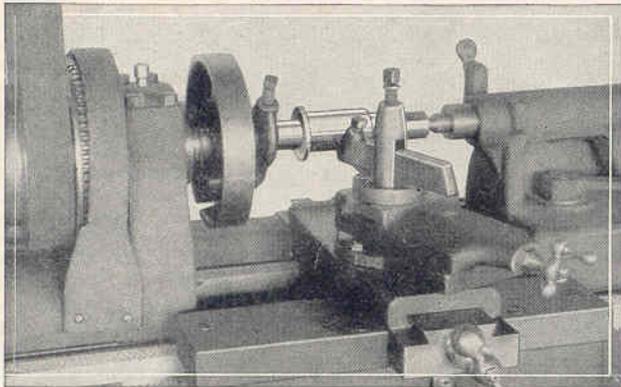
Finishing a Bushing Mounted on a Mandrel.
